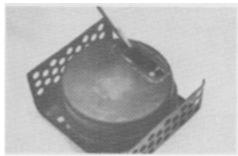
Check port area on muffler assembly for excess carbon deposits.
